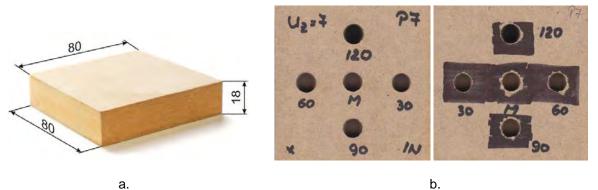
Samples used for drilling: a – sample dimensions; b - MDF specimens drilled with the flat drills (T30, T60, T90, T120, TS) when the tooth bite was 0.7 mm at the entrance side and the exit side.
